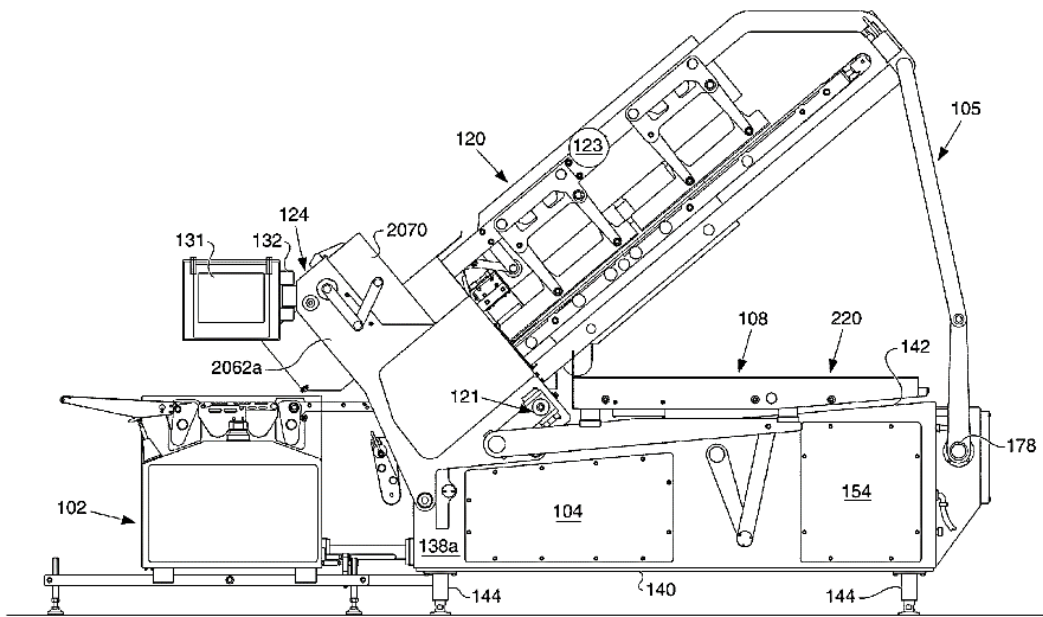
above is “a near side elevational view of a slicing machine and a weighing and classifying conveyor combination.” Ex. 1001, 3:37–38. The ’109 patent’s slicing machine and conveyor combination include base section 104, automatic food article loading apparatus 108 that receives food articles to-be-sliced, and food article feed apparatus 120. *Id.* at 6:60–66. The slicing machine and conveyor combination further include a high speed slicing apparatus having slicing head apparatus 124, slice receiving apparatus 130 (identified in Figure 2), and computer display touch screen 131. *Id.* at 6:60–7:4.
